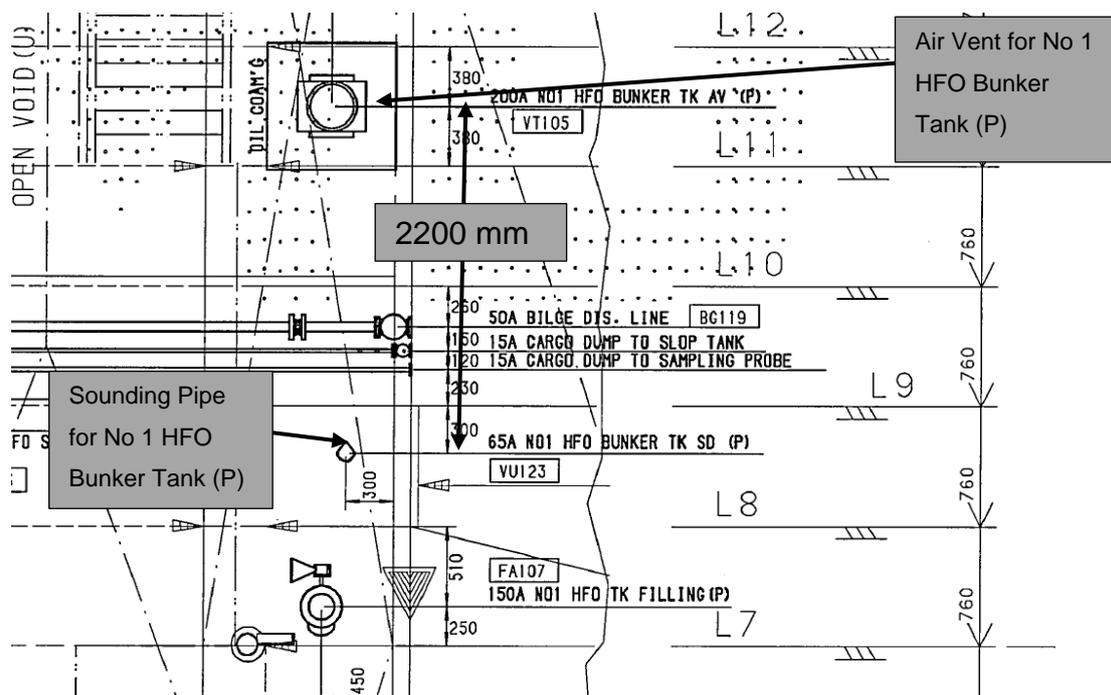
Ship's plan showing the distance between a bunker tank air vent and sounding pipe – detailed view (Piping, 2006)
